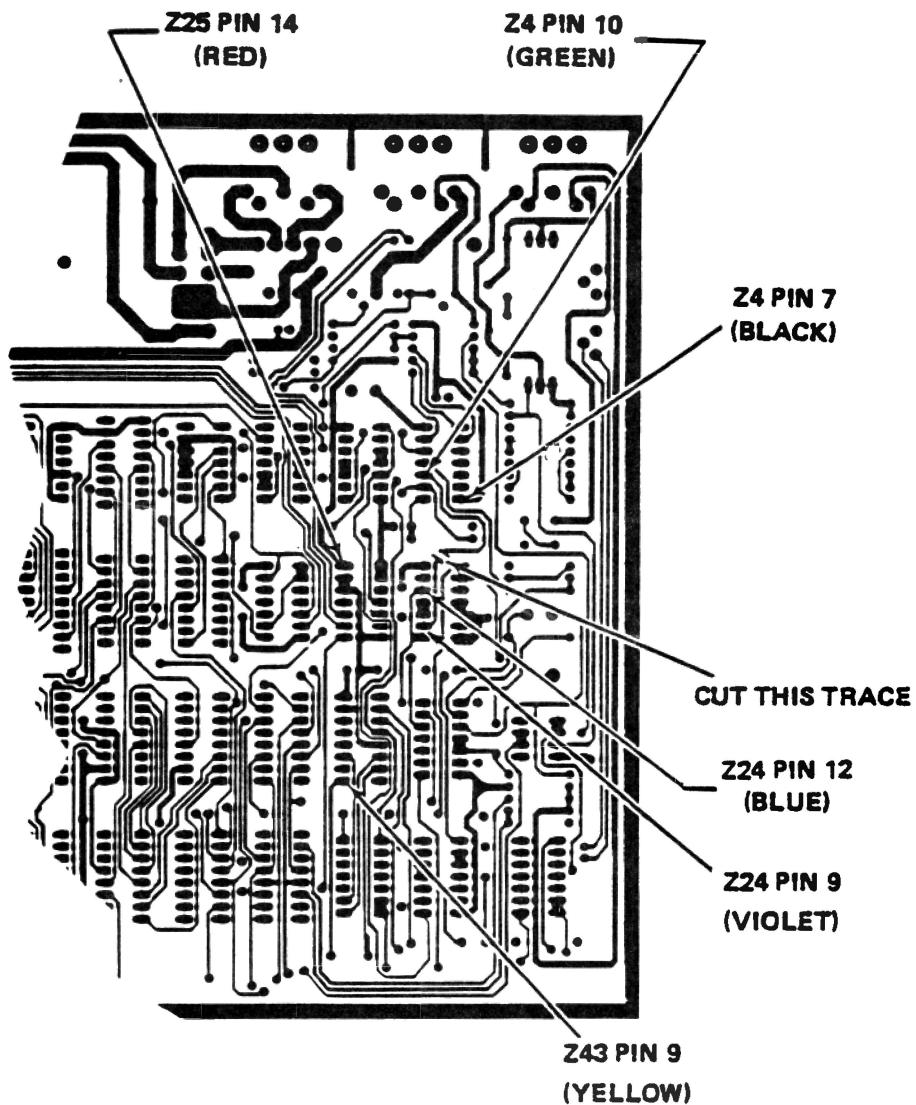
TRS-80 Microcomputer PCB, Bottom Side (Partial View).
